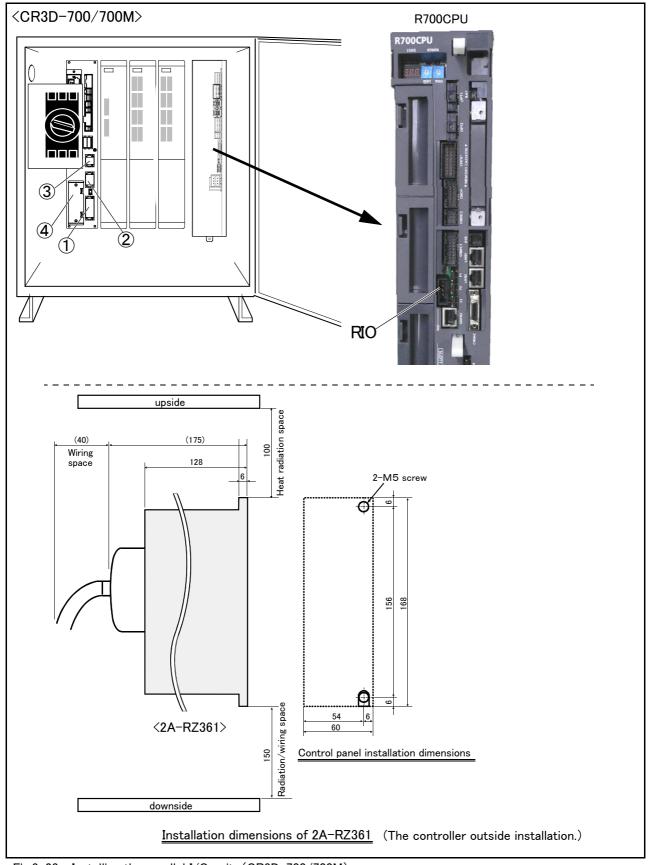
Installing the parallel I/O unit (CR3D-700/700M)
